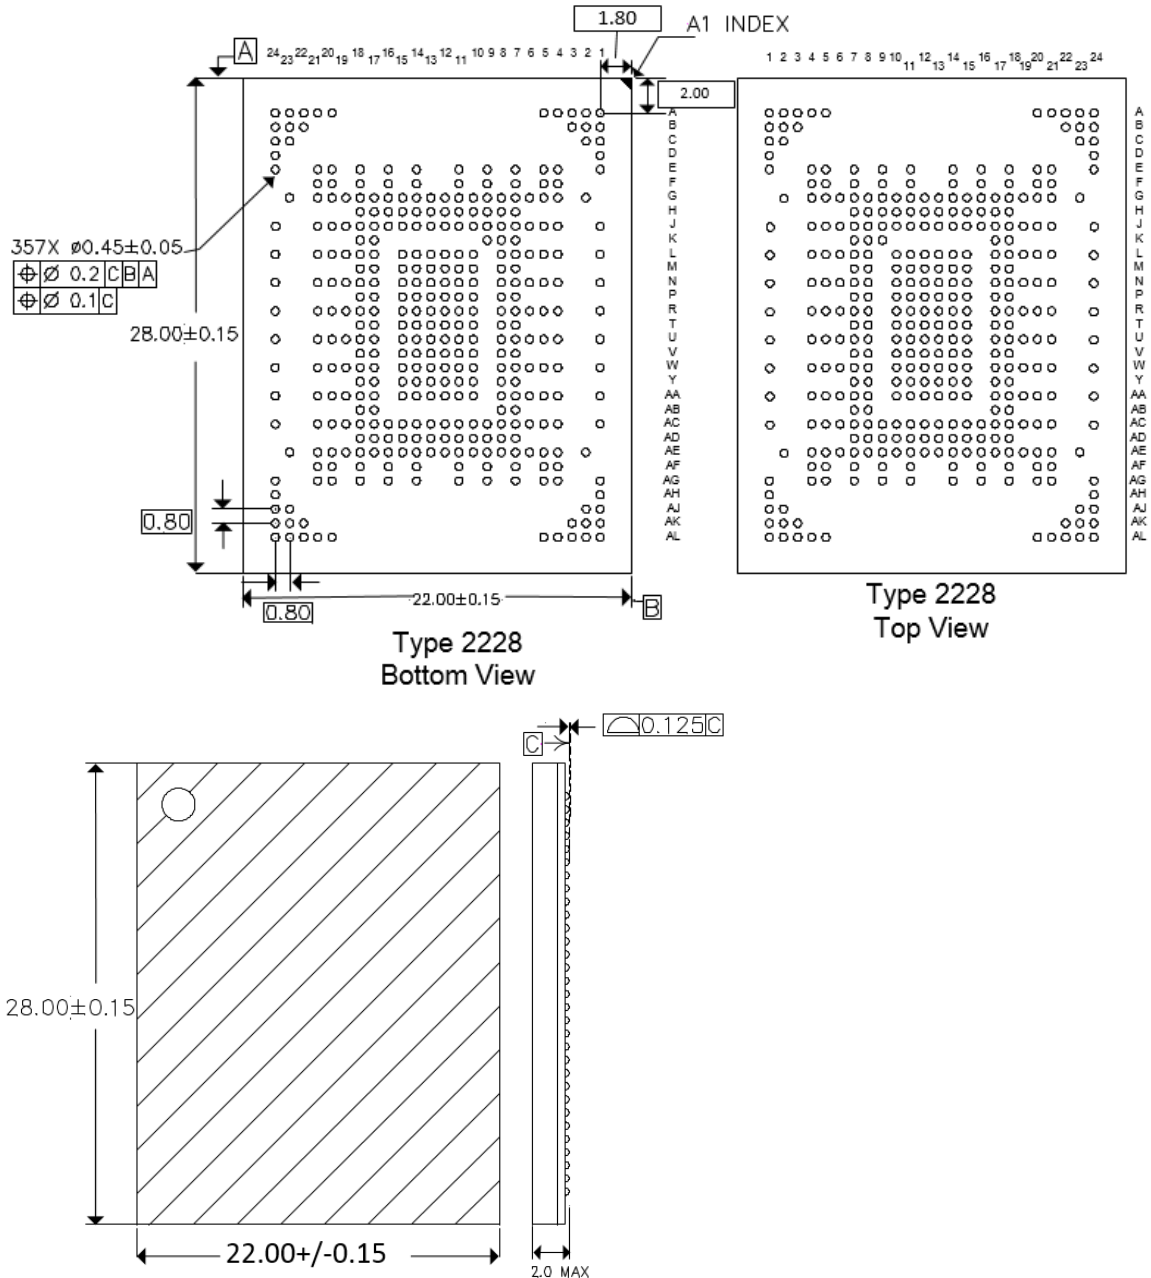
M.2 Type 2228-S5 Mechanical Outline Drawing Example
